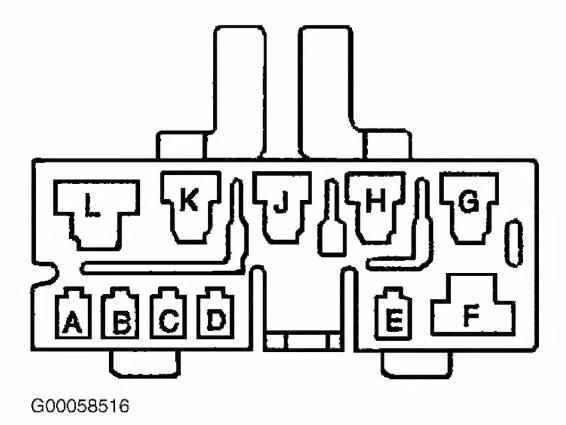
Identifying Door Lock Switch Connector Terminals Courtesy of GENERAL MOTORS CORP.
